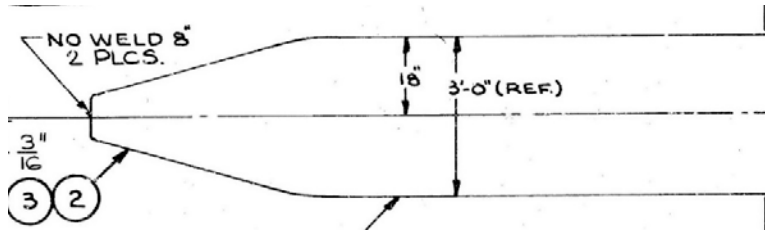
Excerpt of tank car manufacturer drawing showing “no-weld zone “at inboard end of cradle pad.”⁶⁷
